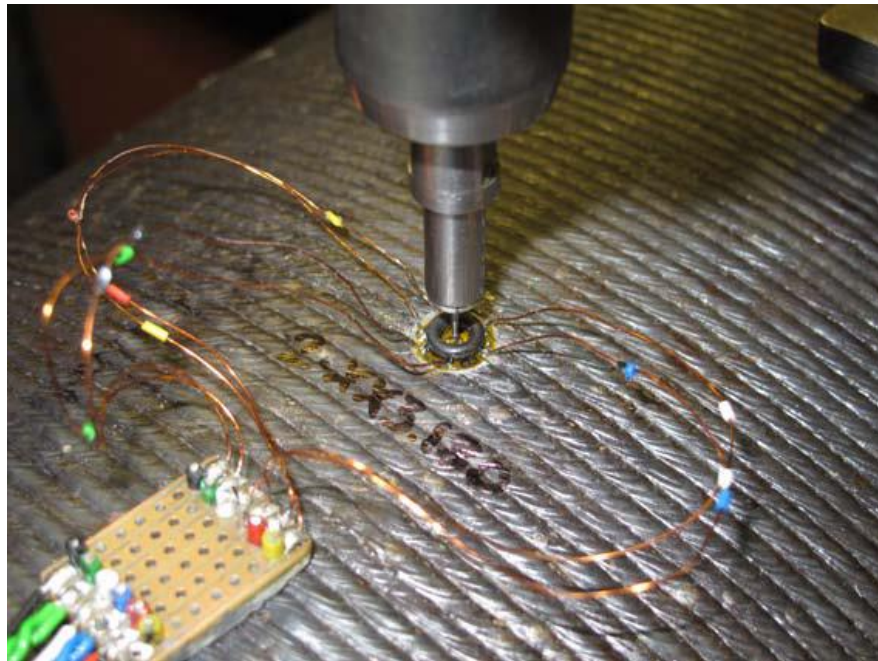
ICHD drilling process utilised by Stresscraft - Figure showing the drilling process on the weld clad cylinder, with the strain gauge wired and the drill placed to drill into the centre of the installed strain gauge rosette (196).
